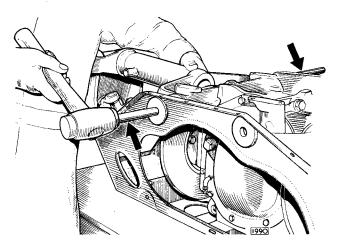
Tapping the dummy shafts into position at the wishbone inner fulcrum
